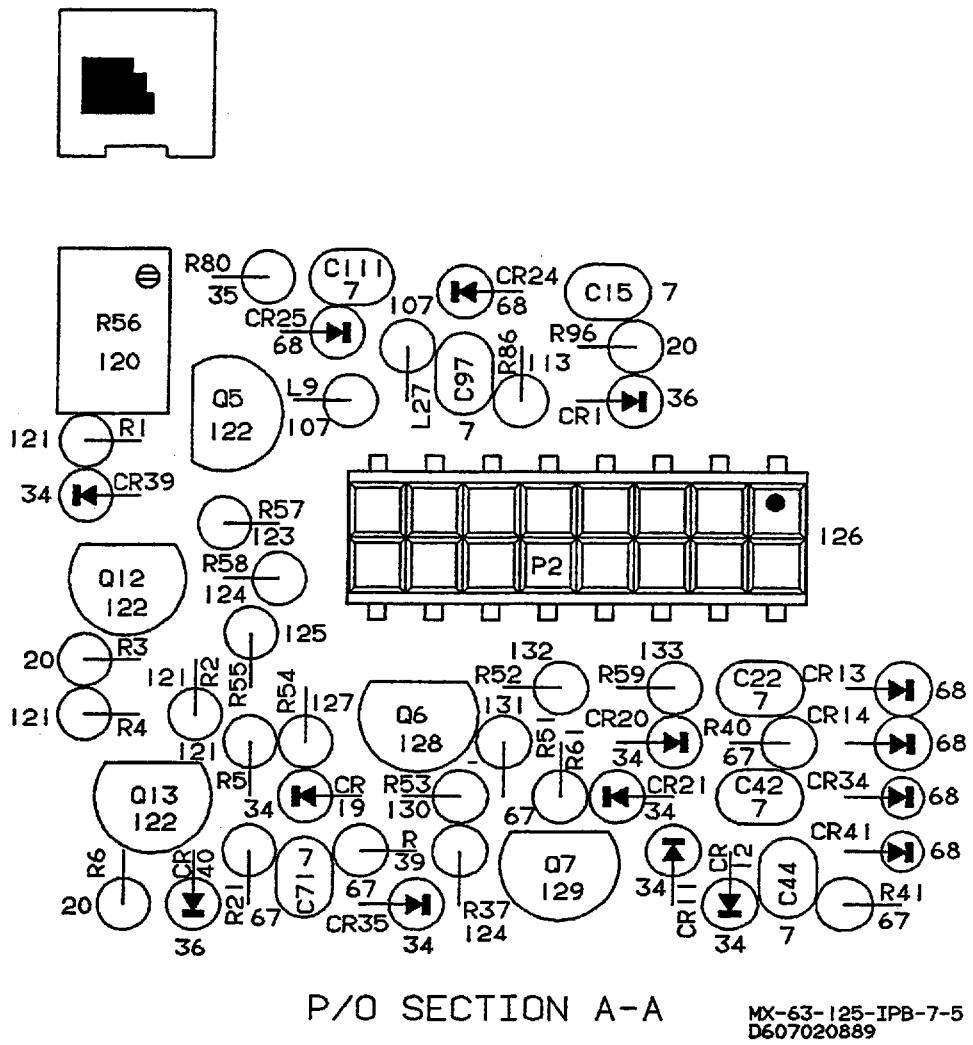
Low Band RF/IF Module Assembly (Sheet 5 of 7)
